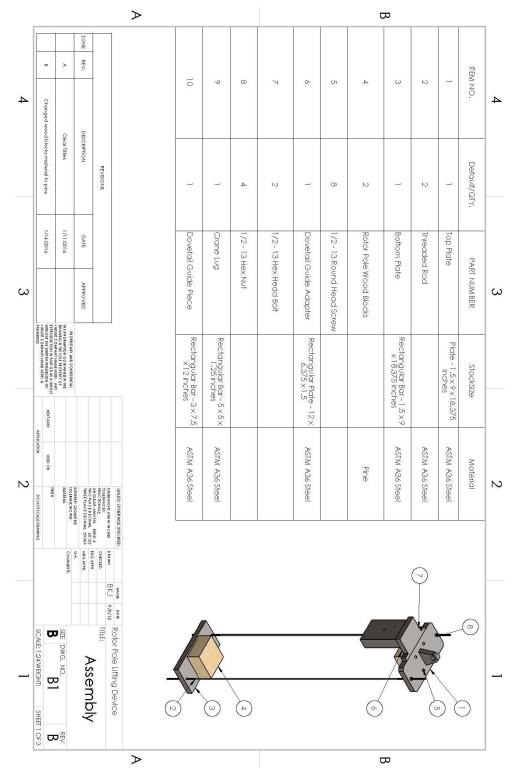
DRAWING OF LIFTING DEVICE ASSEMBLY DESIGN 1
